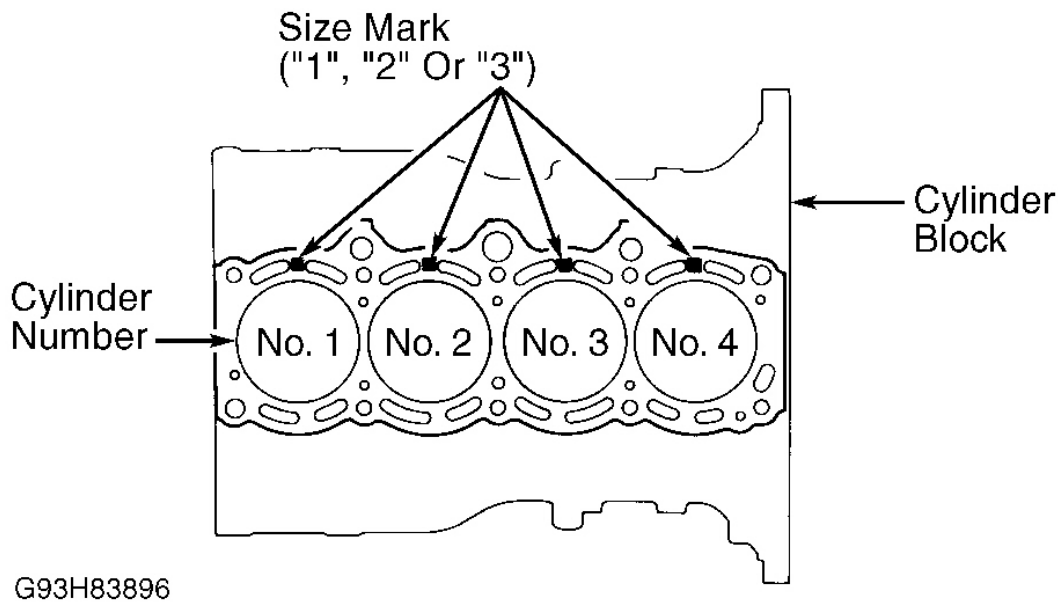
Identifying Cylinder Bore Size Marks (Typical)
